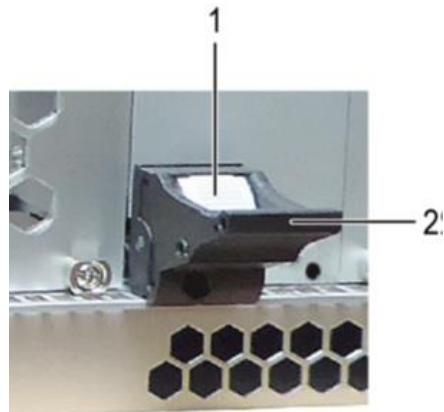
Locking Tab and Pull-Out Lever on Power Supply Unit of a 21-Card Chassis
